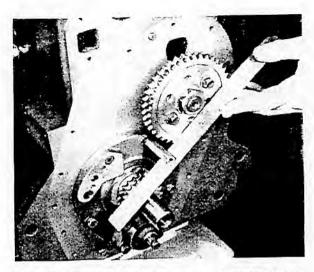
CHECKING ALIGNMENT OF TIMING SPROCKETS
